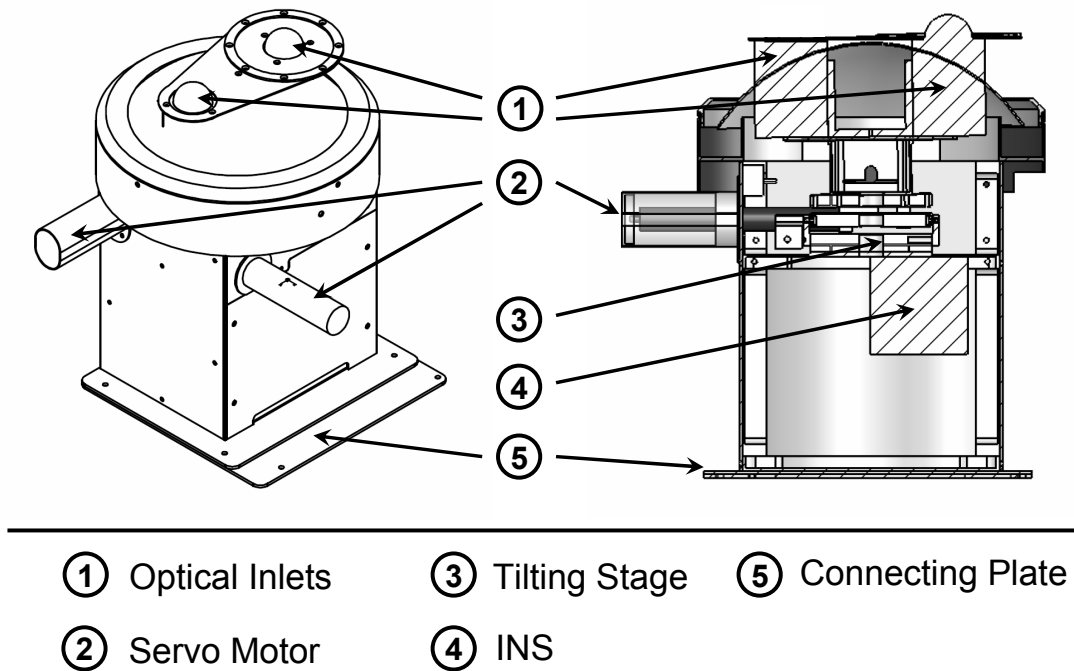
Technical drawing of the upper SMART-Albedometer sensor unit used on POLAR 2 (provided by *enviscope GmbH*)
